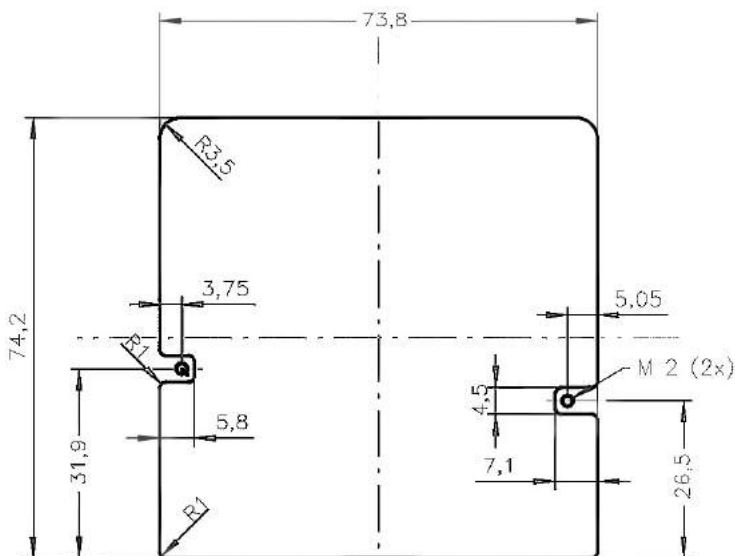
Dimensions front panel installation of GPT-4352 in mm
